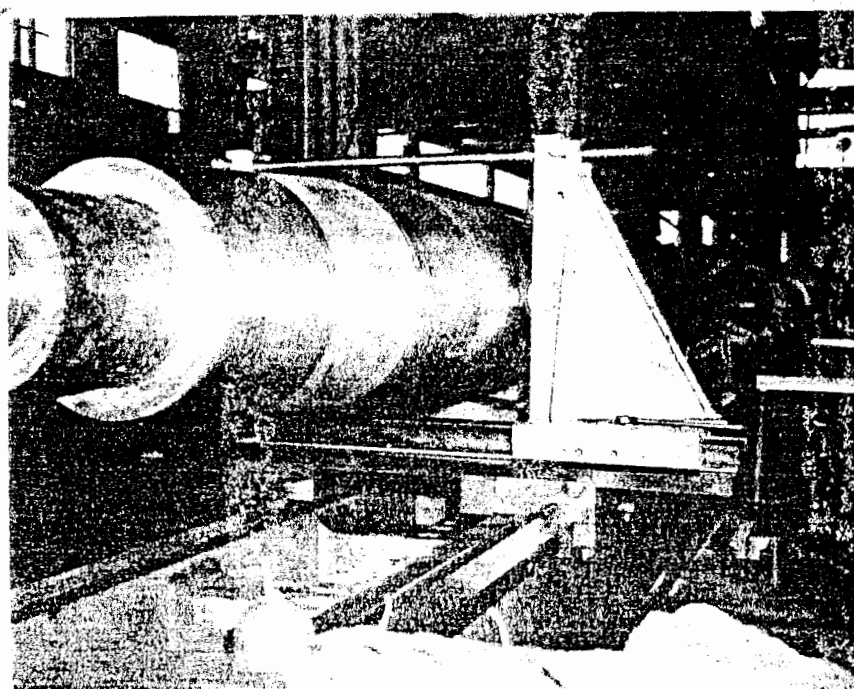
BETHLEHEM ROLLING EQUIPMENT SHOWN ROLLING A PROPELLER SHAFT FOR THE AIRCRAFT CARRIER U.S.S. KITTYHAWK (CVA 64) - "SMOOTHING" ROLLER ON NEAR SIDE.
